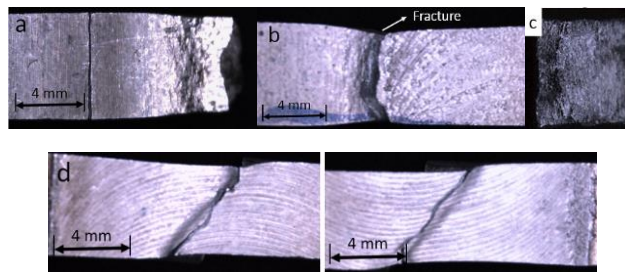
Optical micrographs of weldments a) top view image of the reverse side of a fractured tensile specimen, b) neck formation and fracture, c) fracture morphology sample of welding joints, d) the two samples of tensile fracture locations on the advancing side (sample 1 and 3).
